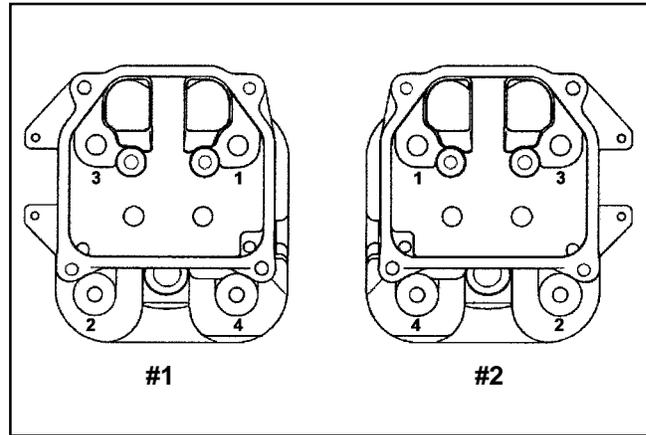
Cylinder Head Fastener Torque Sequence.
